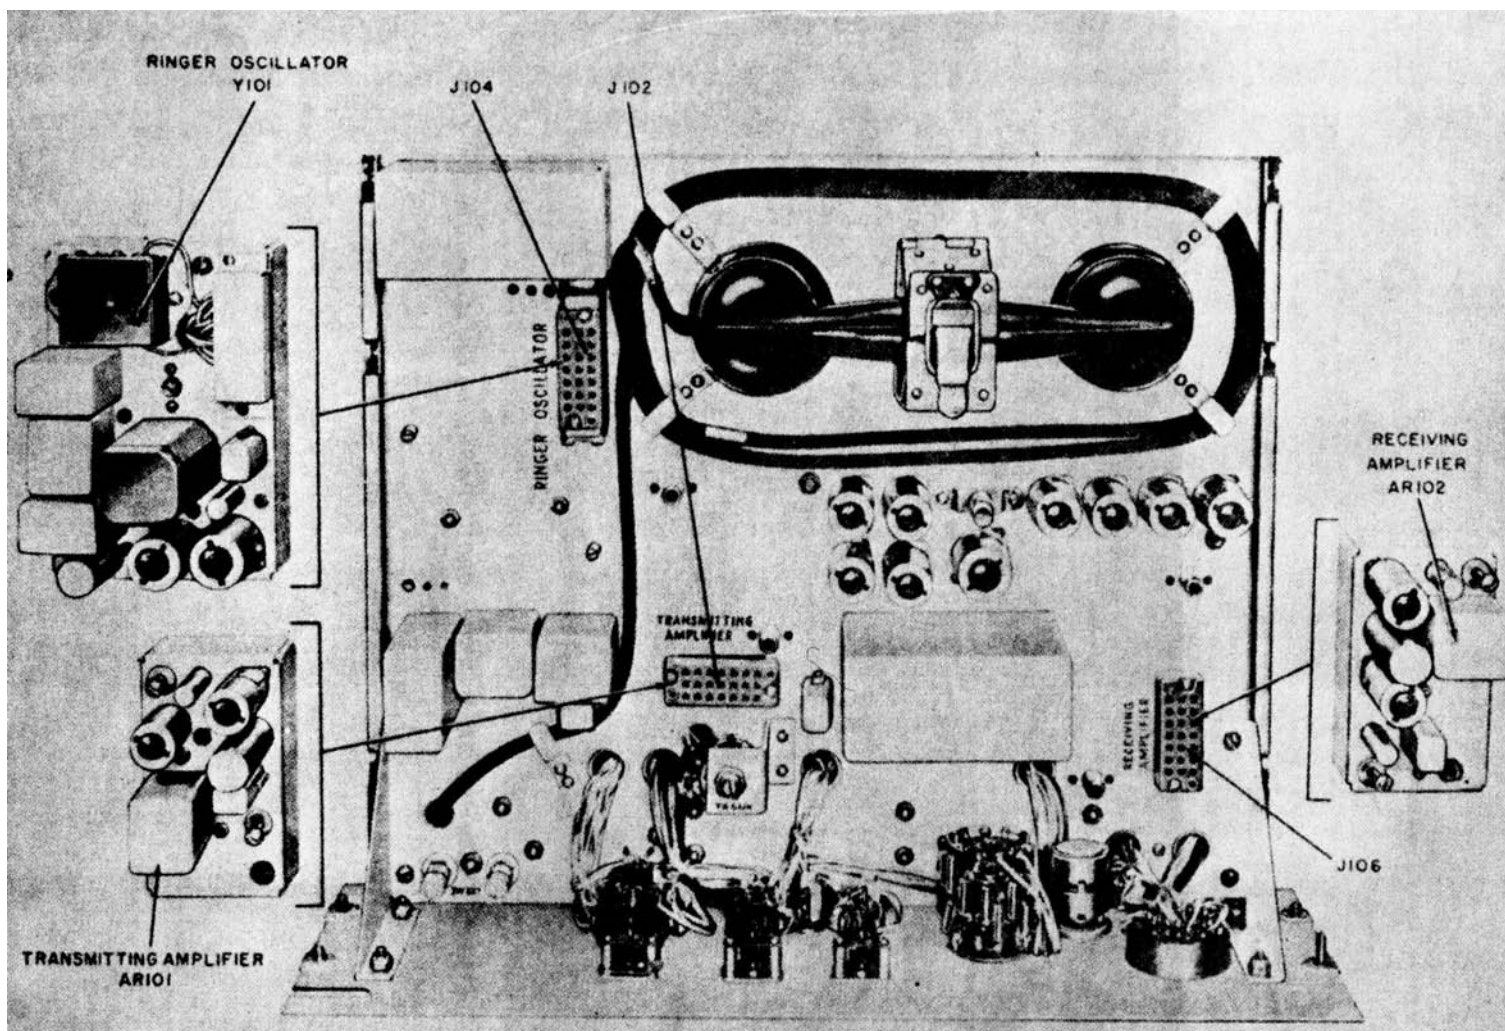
Telephone Test Set TS-760/TCC-7, top view of chassis, location of plug in assemblies.
